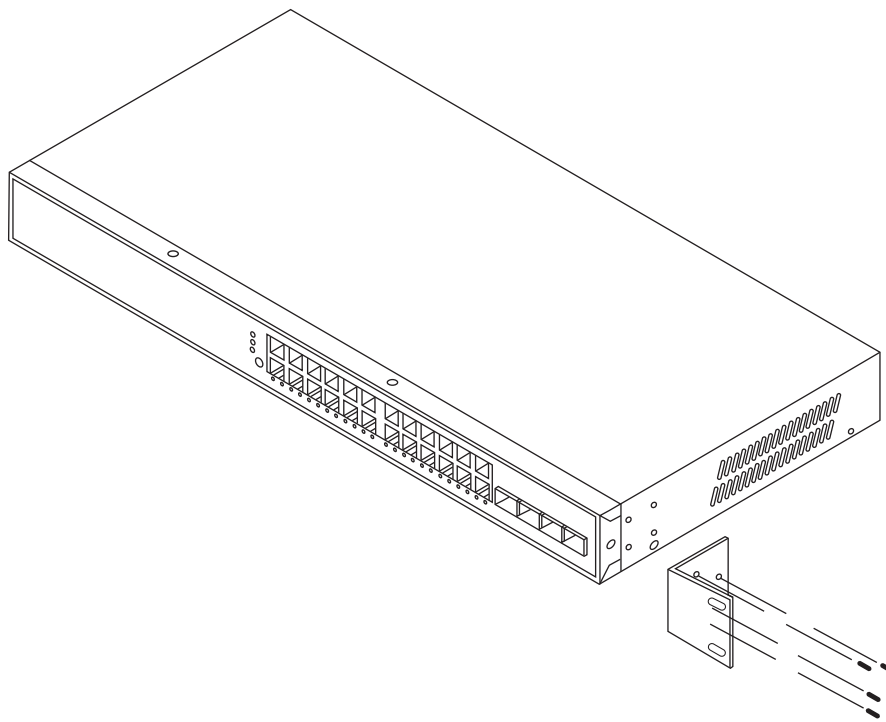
ATTACH THE MOUNTING BRACKETS
